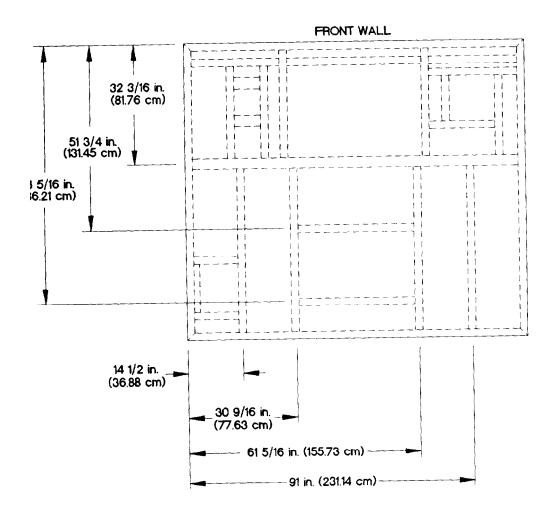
M1079 Van Body Interior Accessory Mounting Hardpoints.
